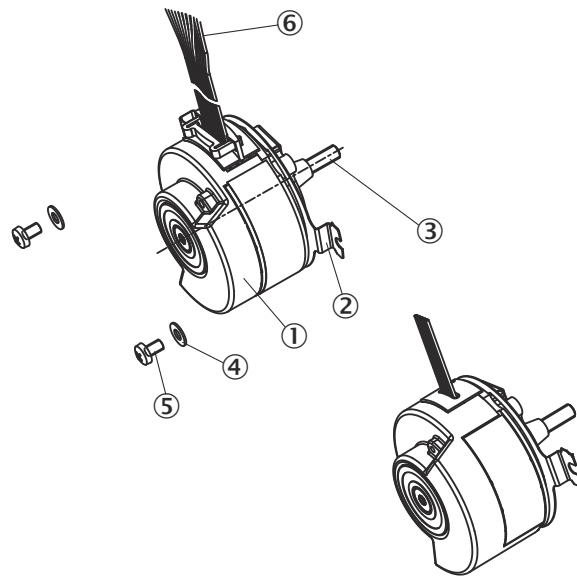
Motor feedback system with tapered shaft and spring mounting support
